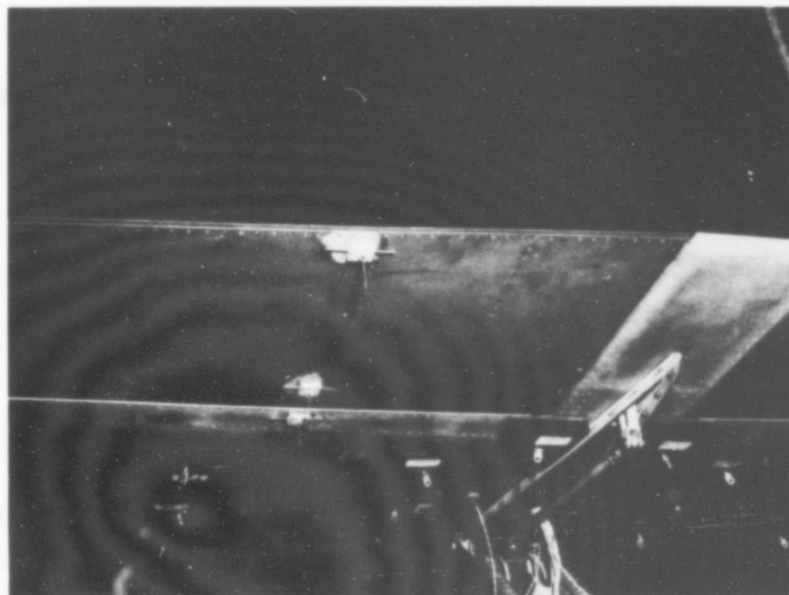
View of Bottom Side of Elevator Showing Deflection Instrumentation Pickup
